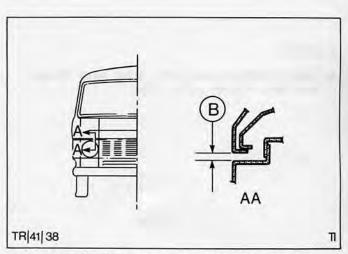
Hood alignment - underside of hood to radiator grille panel  $B-7,5+1,5\,\mathrm{mm}$
